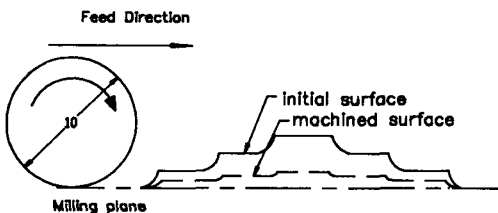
Initial surface profile and machined surface after down milling with uniform feedrate
